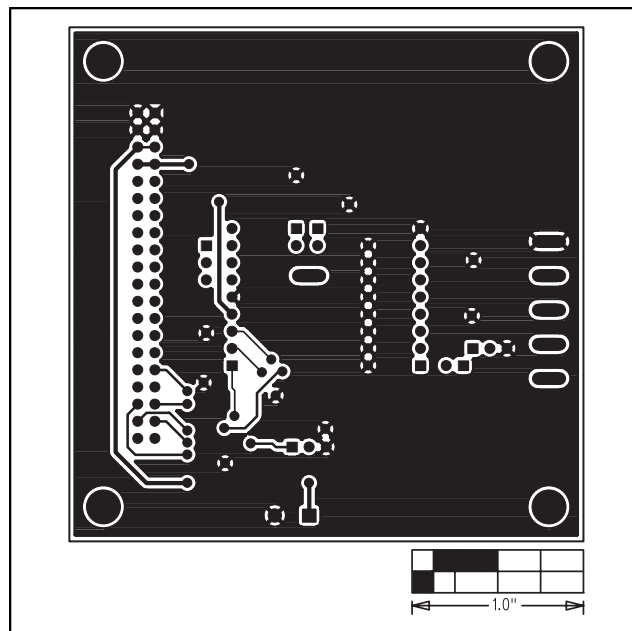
MAX1254 EV Kit PC Board Layout—Solder Side
